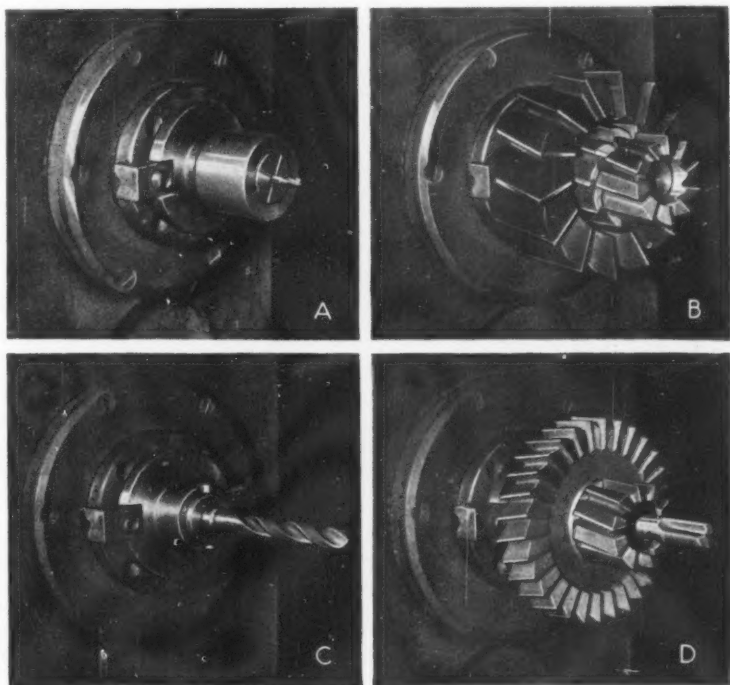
Typical cutter set-ups that can be obtained on a horizontal milling machine. A— $\frac{1}{8}$ -in. diameter end mill in collet and adapter; B—compound assembly of a large face mill and two smaller cutters; C—drill, held in a hollow insert; D—compound set-up incorporating a slotting cutter
